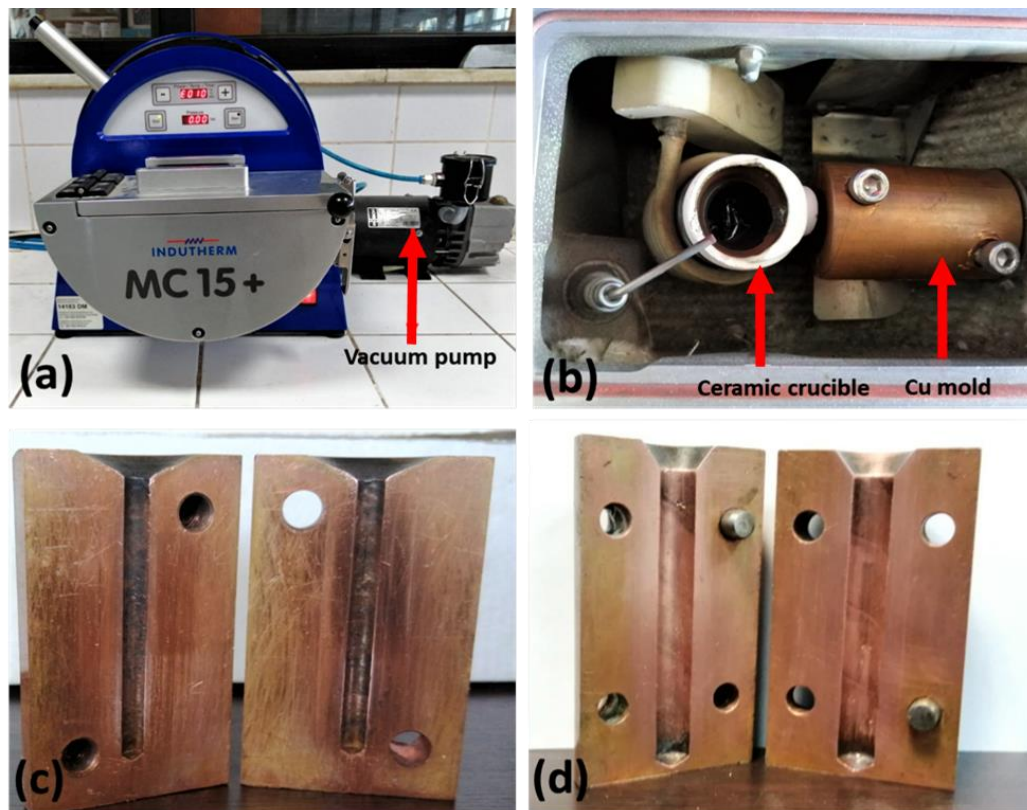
1 a) Indutherm MC+15 Induction Casting Machine, b) important parts of the machine, (c) 5 mm diameter Cu mold, (d) 10 mm diameter Cu mold
